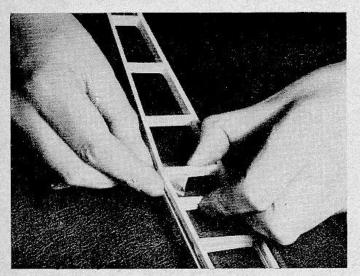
The two fuselage sides should be carefully parted with a razor blade.
